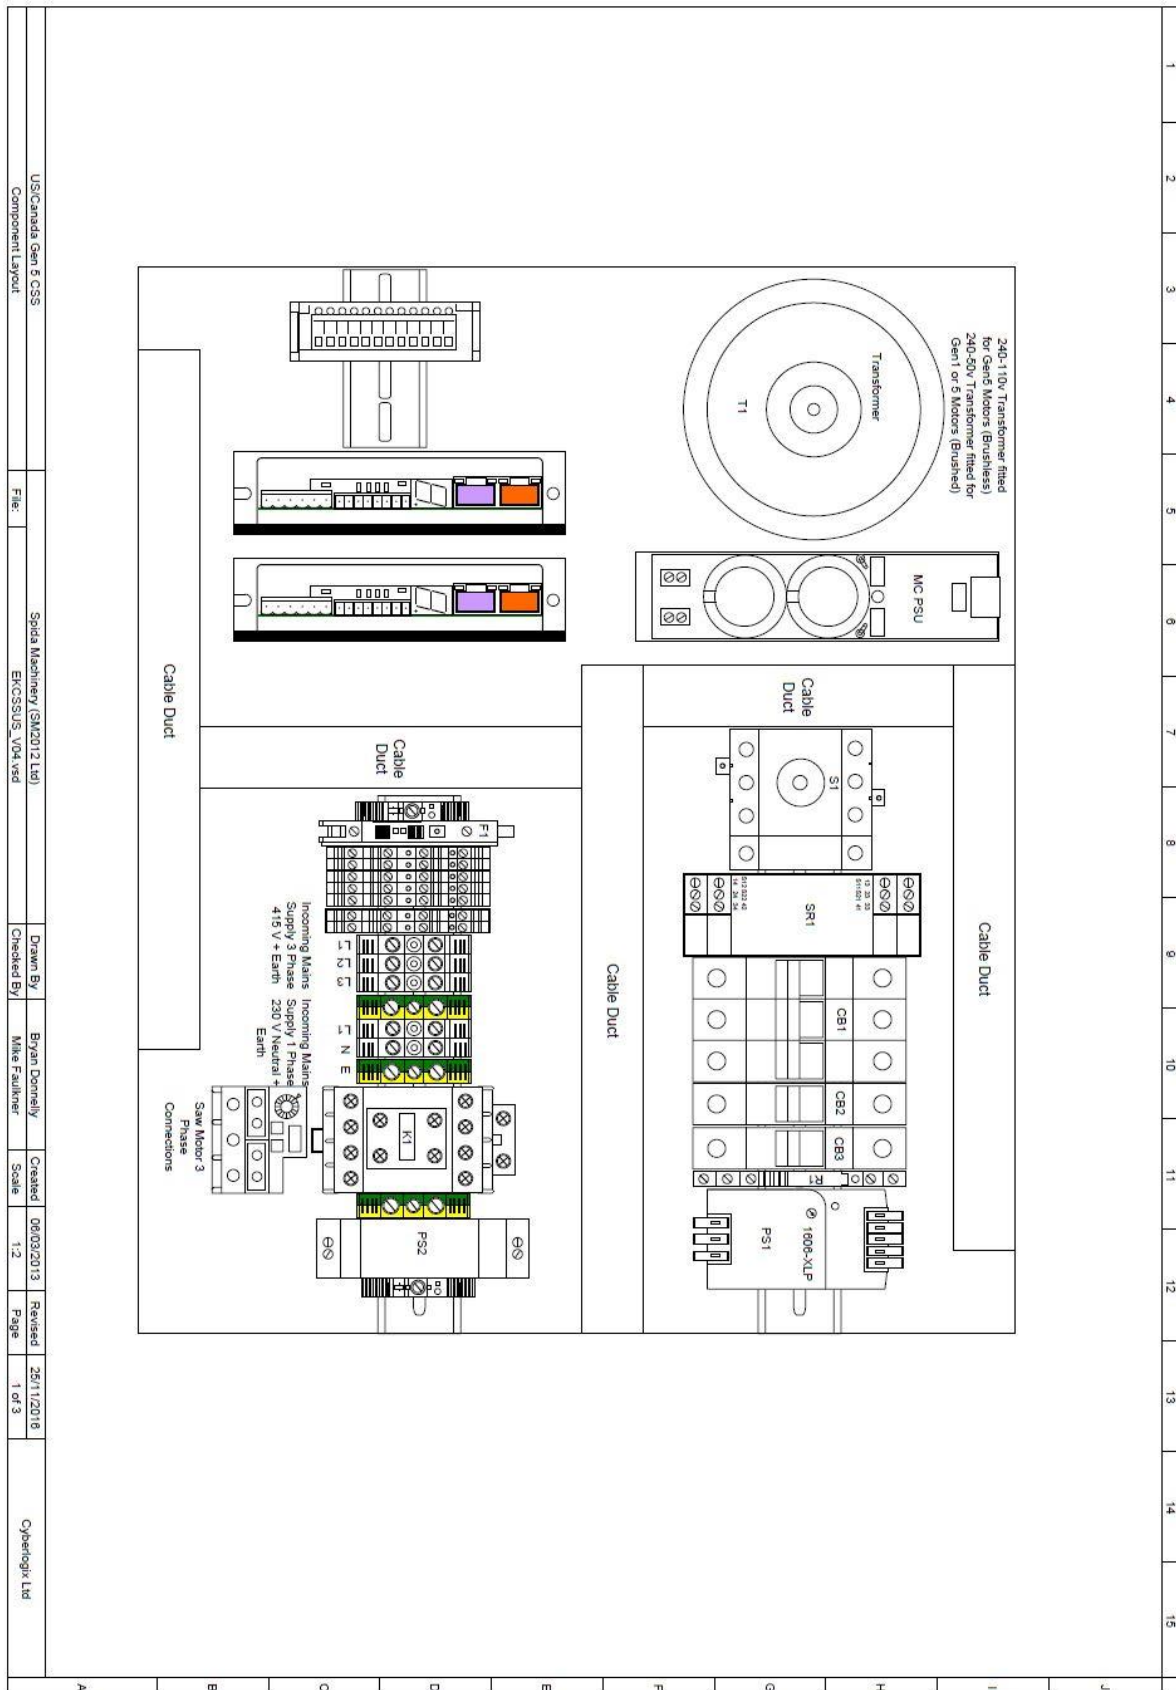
, CSS Vector Saw Electrical Drawings US part 1
